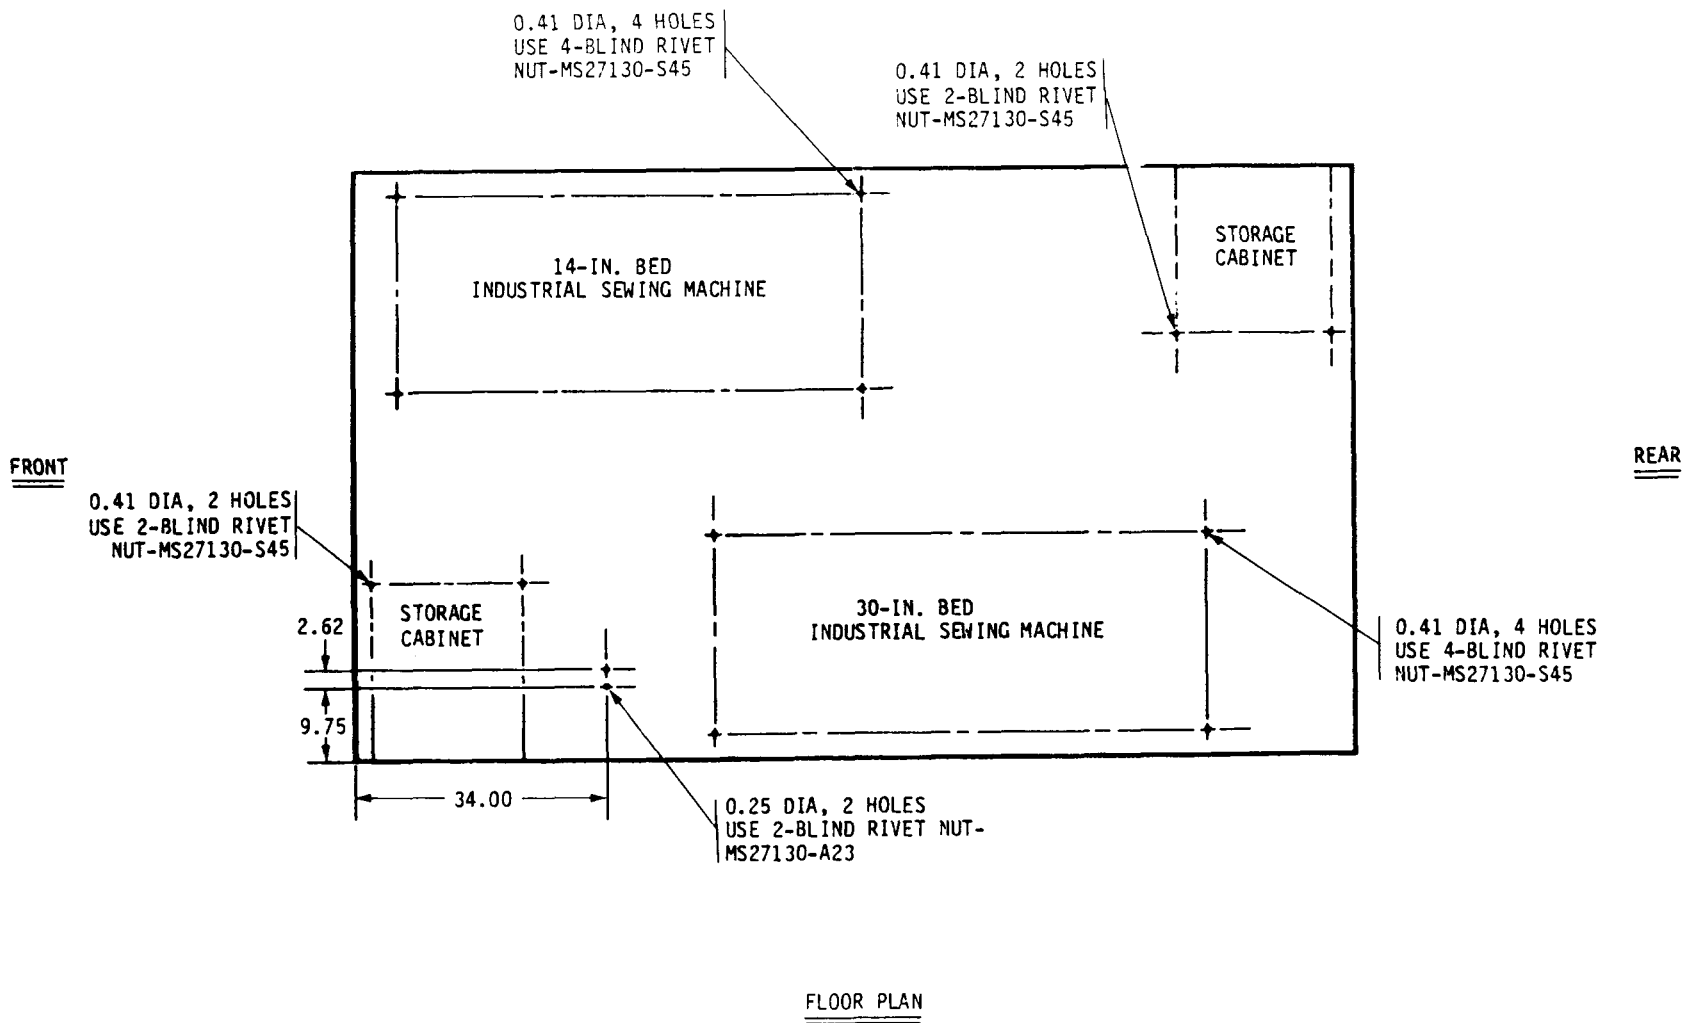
Hole Dimensions for Mounting Holes and Strap Loops, Unit 1, 280.
